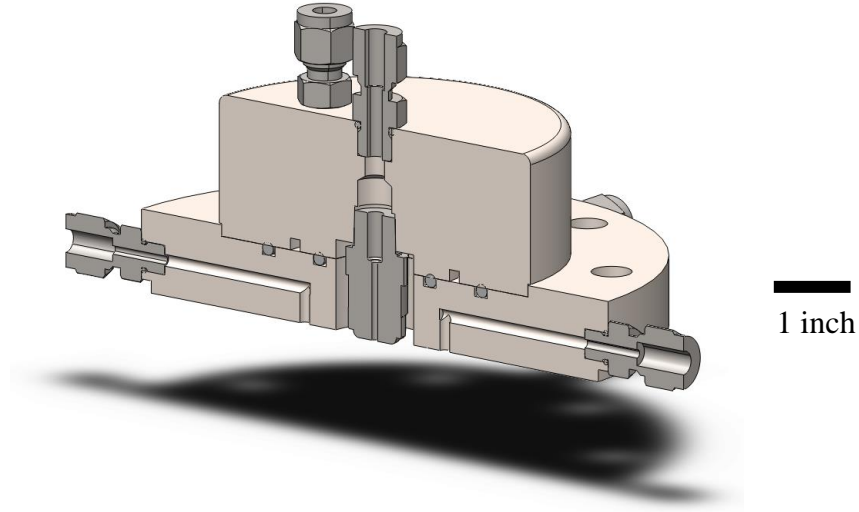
CAD cutaway view showing instrumentation ports in the injector flange used for combustion chamber pressure and temperature measurement.
